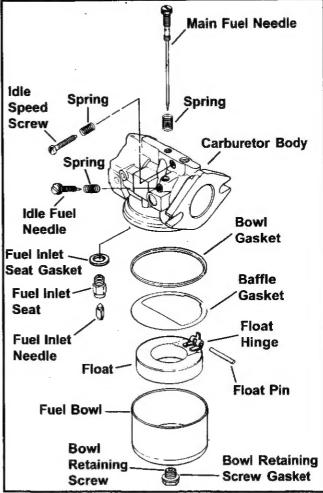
Kohler-Built Adjustable Jet Carburetor-Exploded View.
